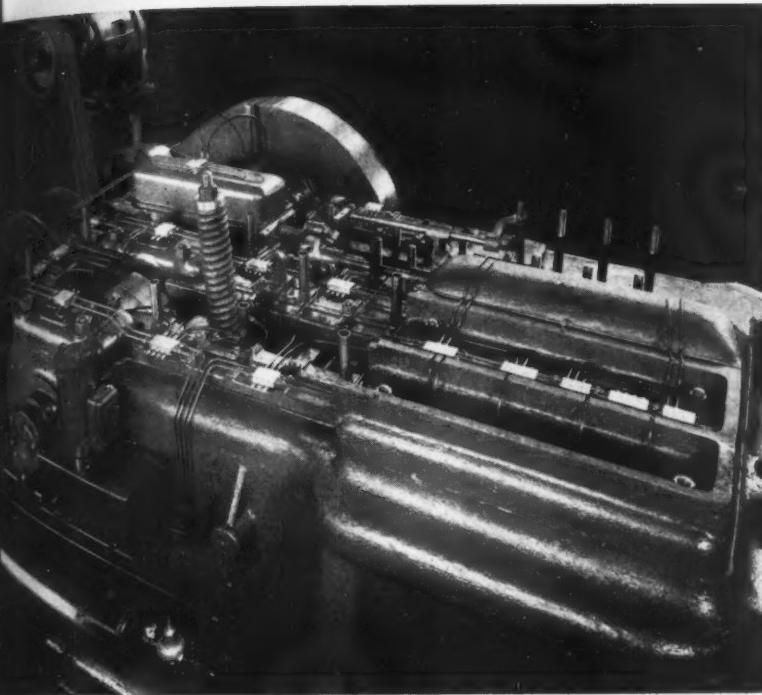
Two-line type of displacement valve in which sliding spool reverses direction of valve operation
